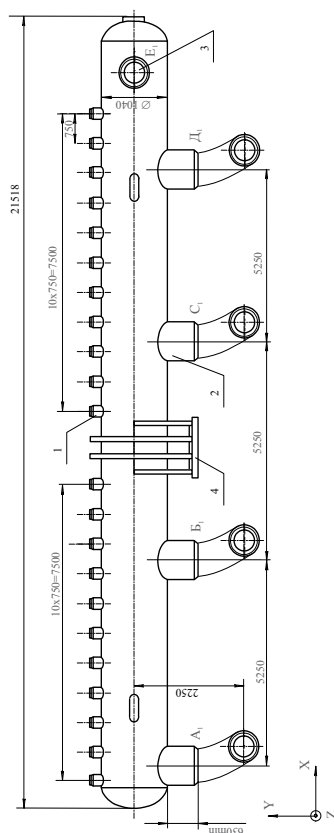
Sketch of header pumping: 1 - nozzle DN300 to joint RGK; 2 - nozzle DN750 and elbow to joint with pipe-line pumping; 3 - nozzle DN750 to joint with unit between headers in-take and pumping; 4 - central stopper
